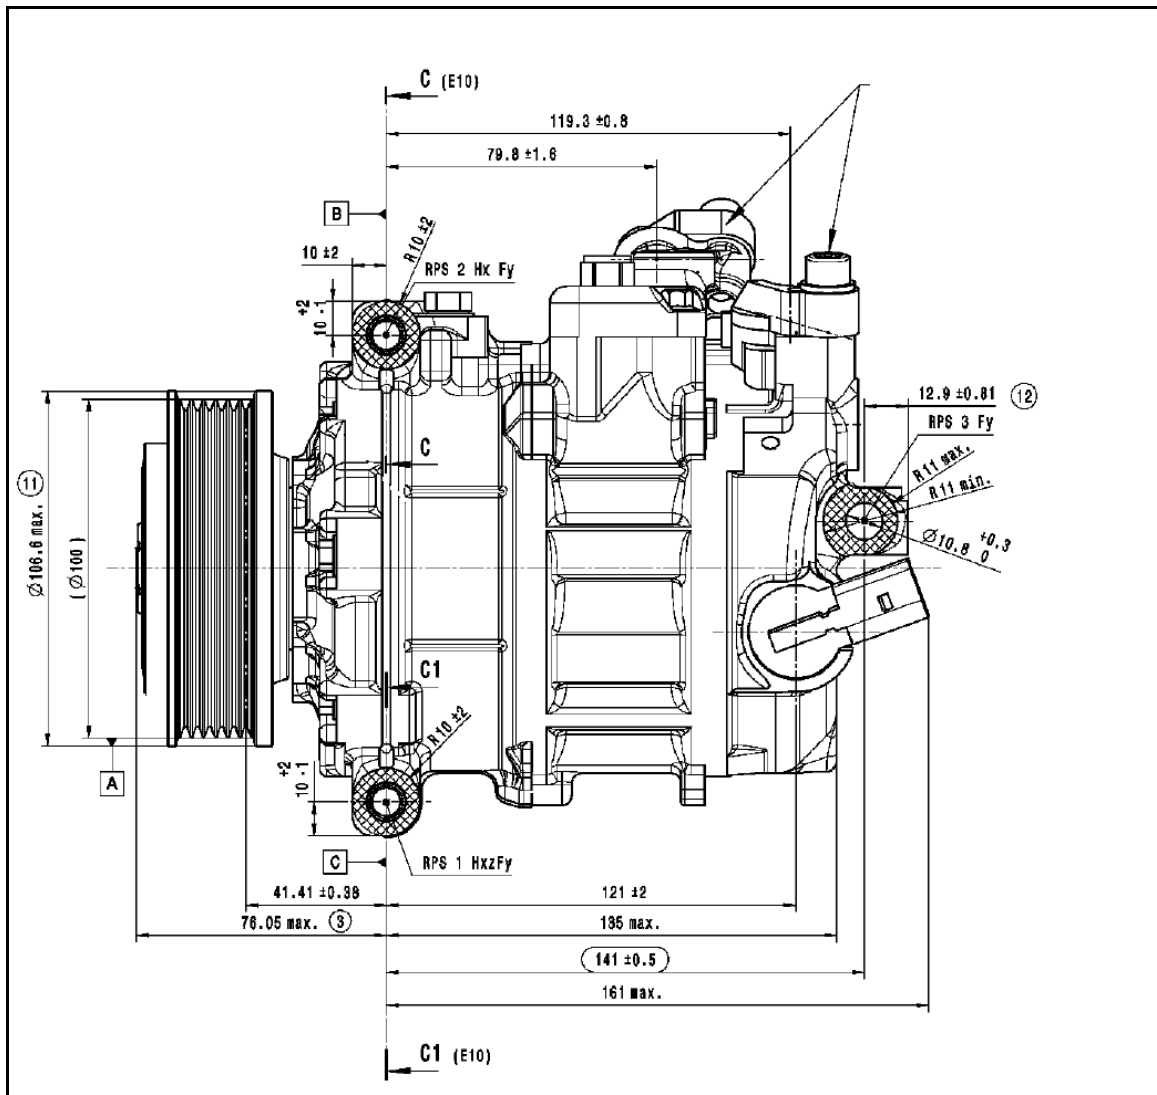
Dimensions of air-conditioning compressor Denso 7SU17 (7E0.820.803), pulley diameter 100 mm, (side view)
